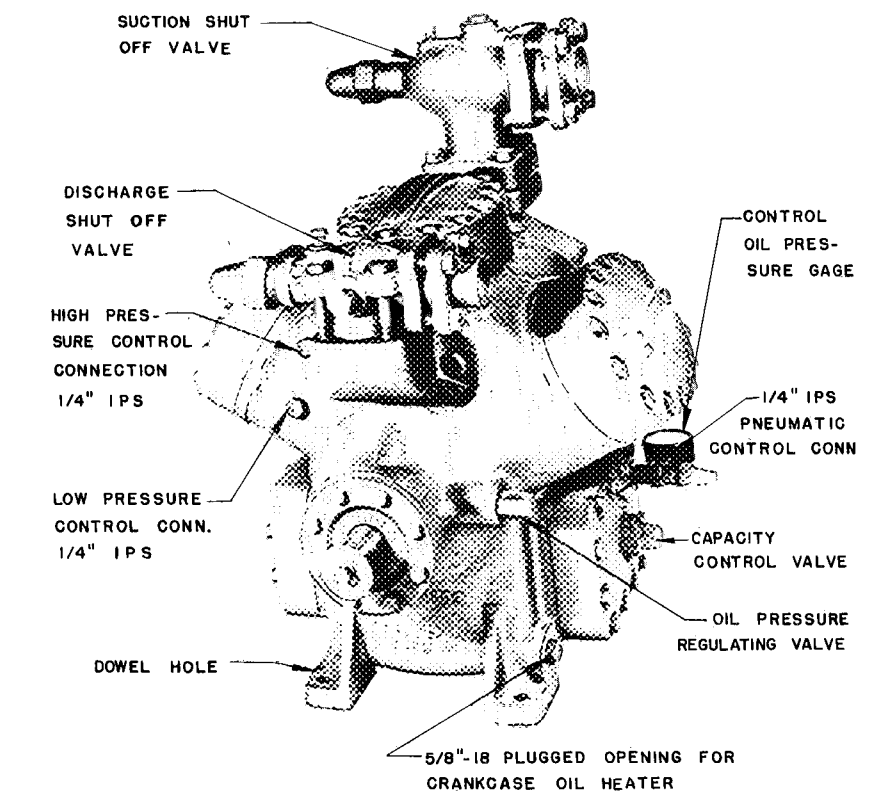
5F60 COMPRESSOR (SIDE AND PUMP END VIEW)
